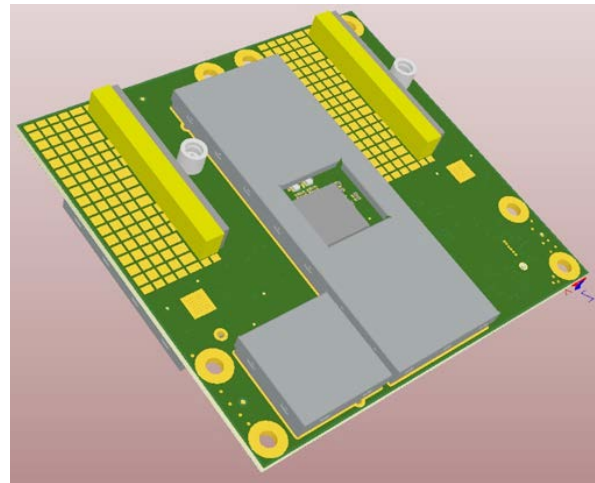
3D CAD Drawing of Reference Design with Heatsink Removed
